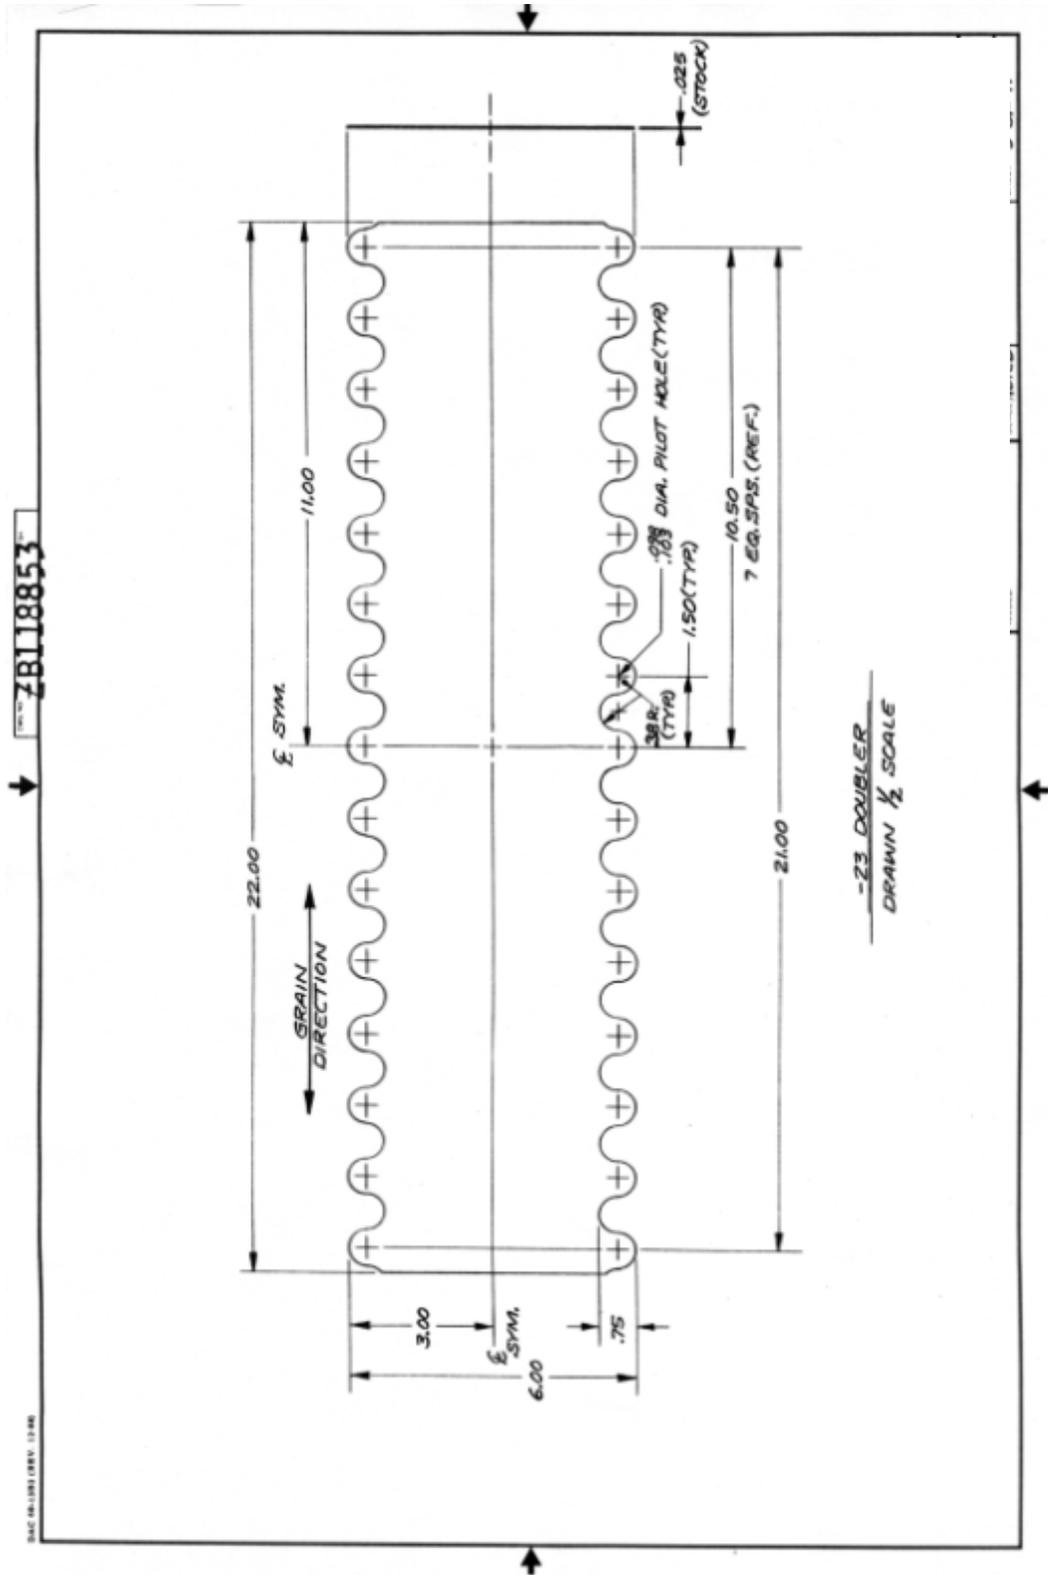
EQUIVALENT INITIAL FLAW SIZE PANEL ASSEMBLY DRAWINGS
